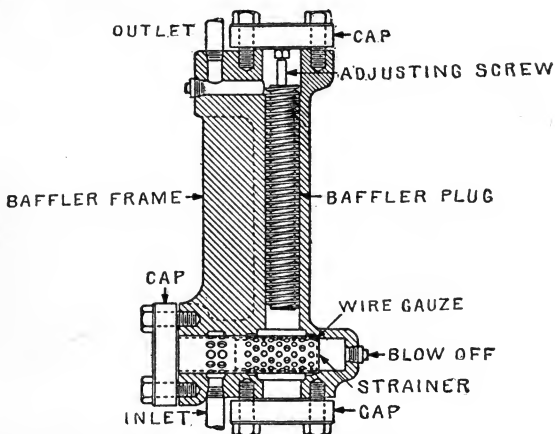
,478.—Curtis step bearing baffle for regulating the pressure at the step bearing. It consists of a long screw plug inserted into the body of the device and past which the oil must flow to the step bearing. The more turns, the greater the resistance offered to the flow.
